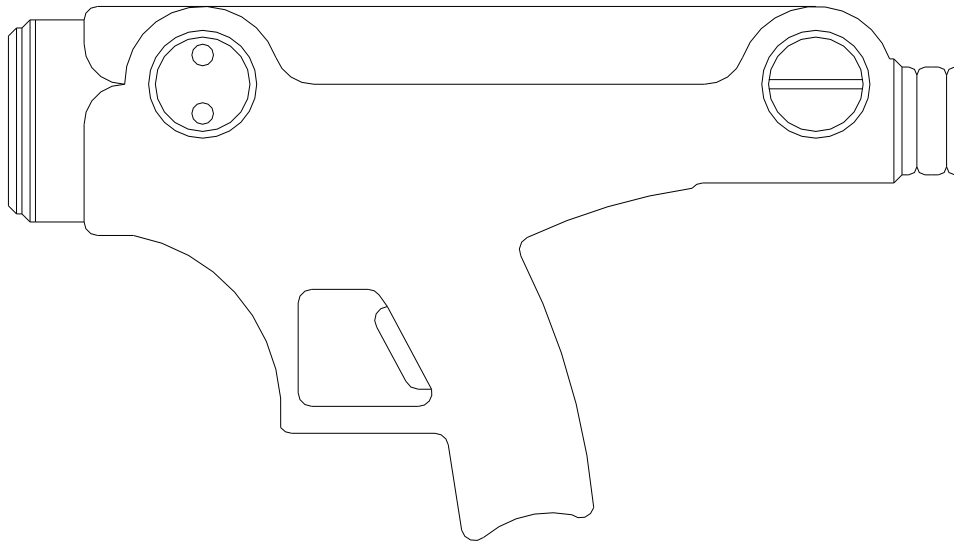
Appearance of a “pistol” model layout of a handheld laser tool with a button for controlling laser radiation.
